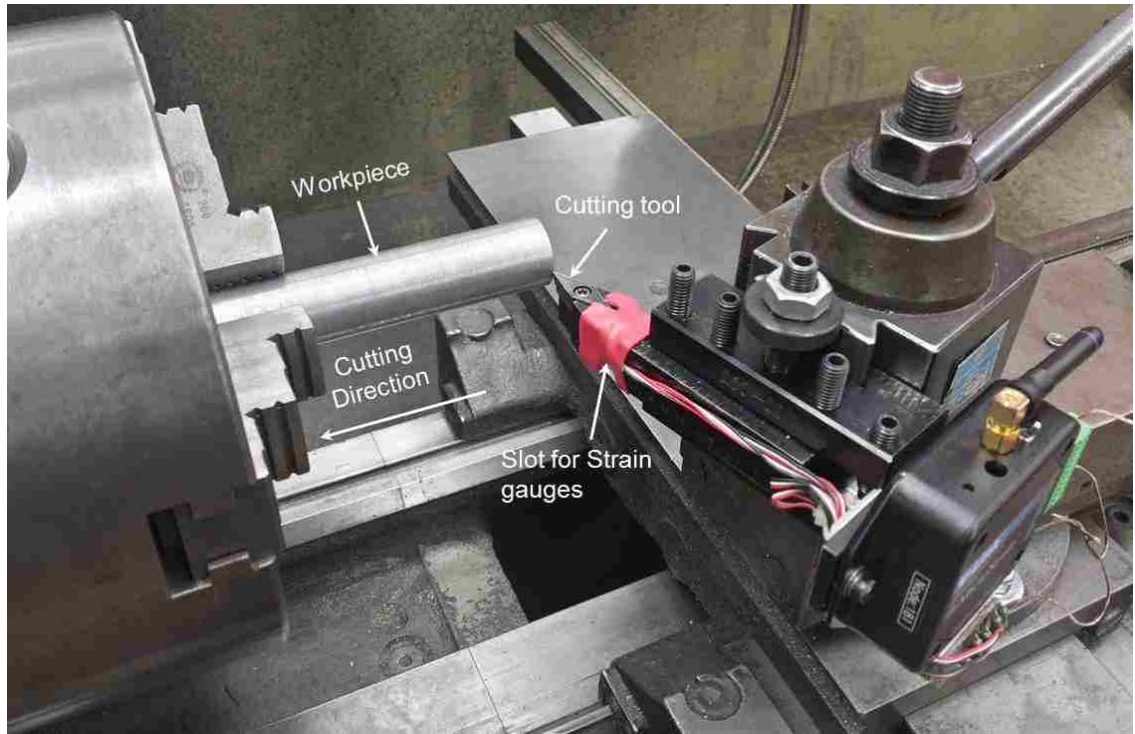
Experimental setup for orthogonal machining showing the position of cutting tool and the strain sensor assembly for obtaining cutting force data
